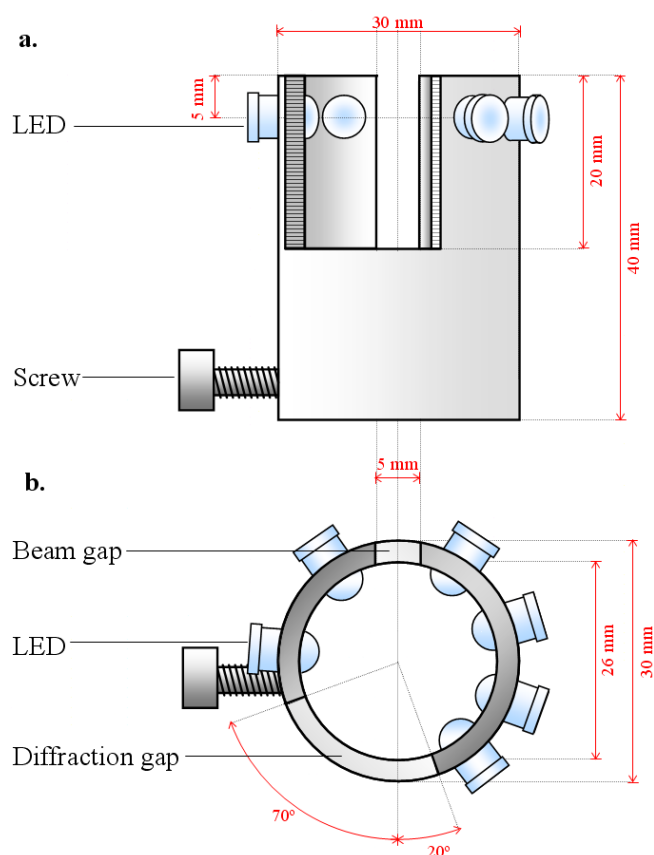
Schematic drawing of LED ring, a – side view and b – top view
